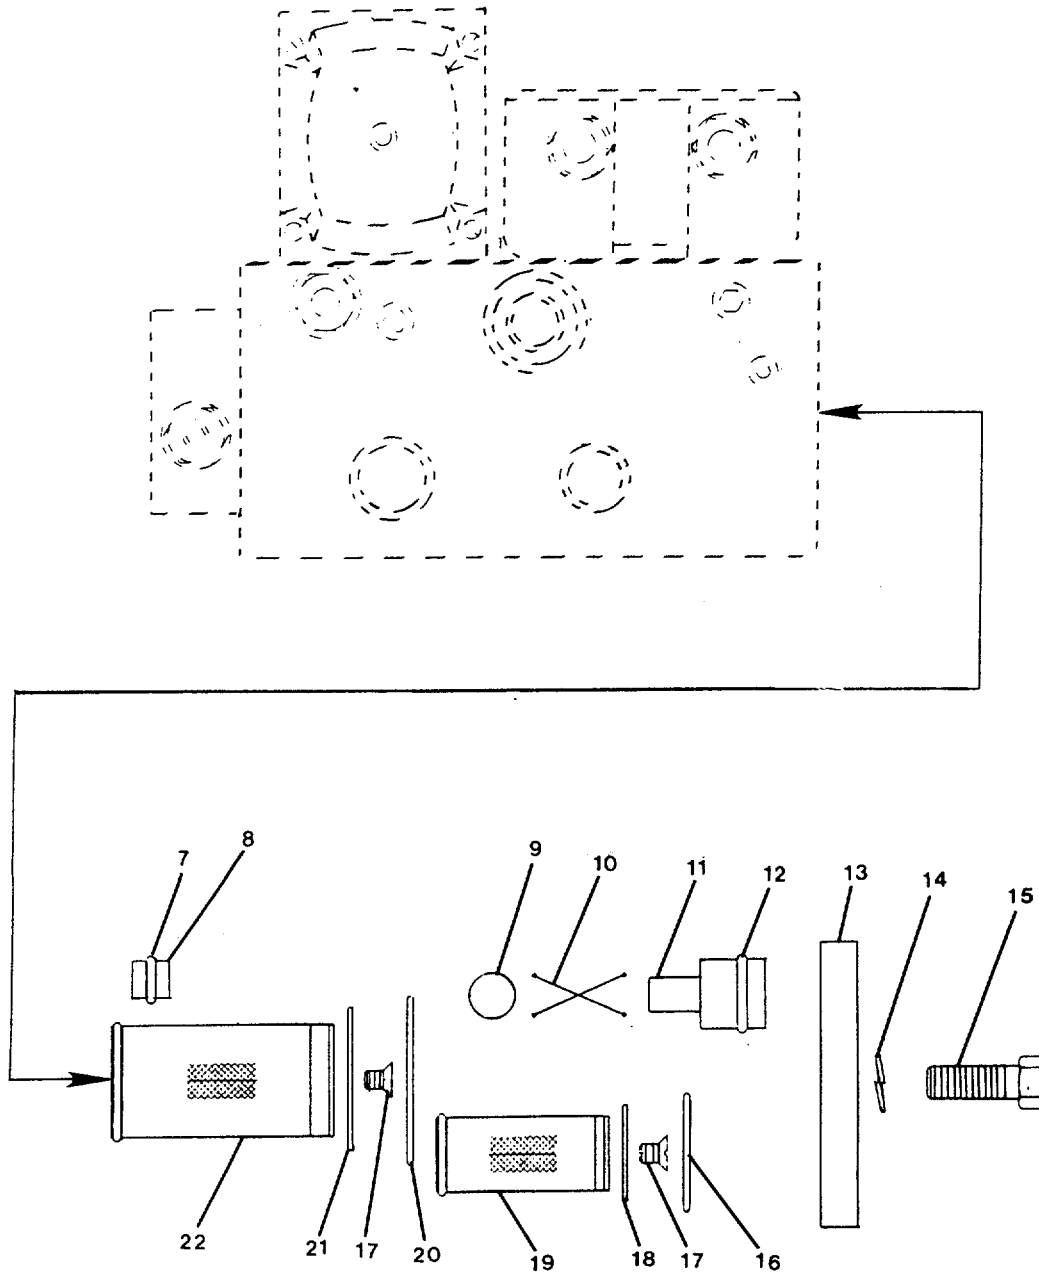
Uniblock 2A Assembly (Sheet 2 of 3).
